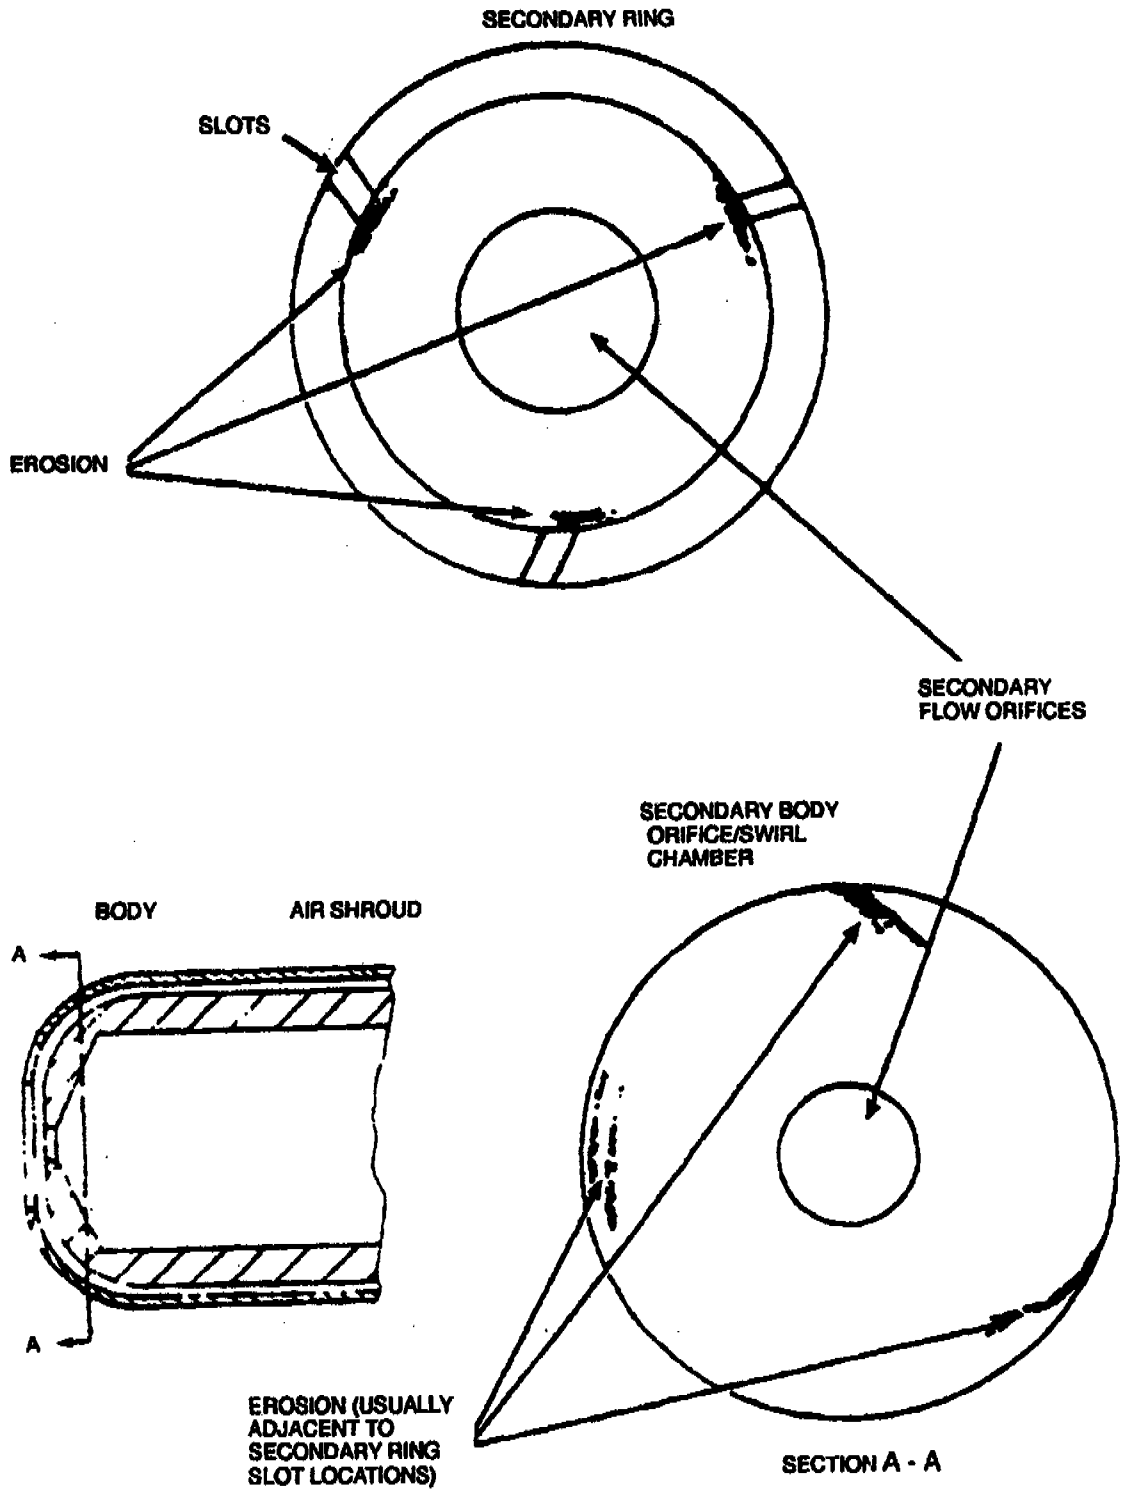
Nozzle Body and Secondary Ring/Swirl Chamber - Inspection.
